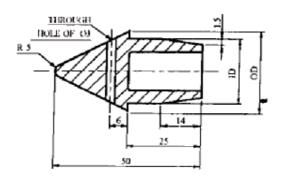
TYPICAL DRAWING OF CAP FOR TUBE END
